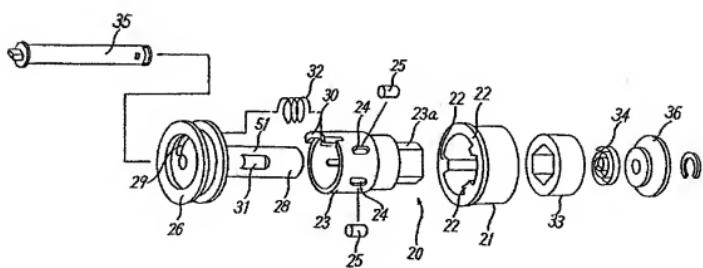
is a partially cut-away front view showing an embodiment of a roll screen which practices the present invention. FIG. 2 is an exploded perspective view showing an operation device in the roll screen shown in FIG. 1. FIGS. 3 (a) and (b) are explanatory views depicting operations of the operation device shown in FIG. 2. FIG. 4 is a cross-sectional view showing another embodiment of the roll screen.
